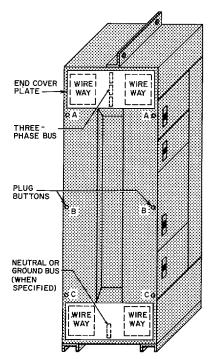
Side view showing cover plates, plug buttons and joining points for 20-in. (508 mm) deep section
